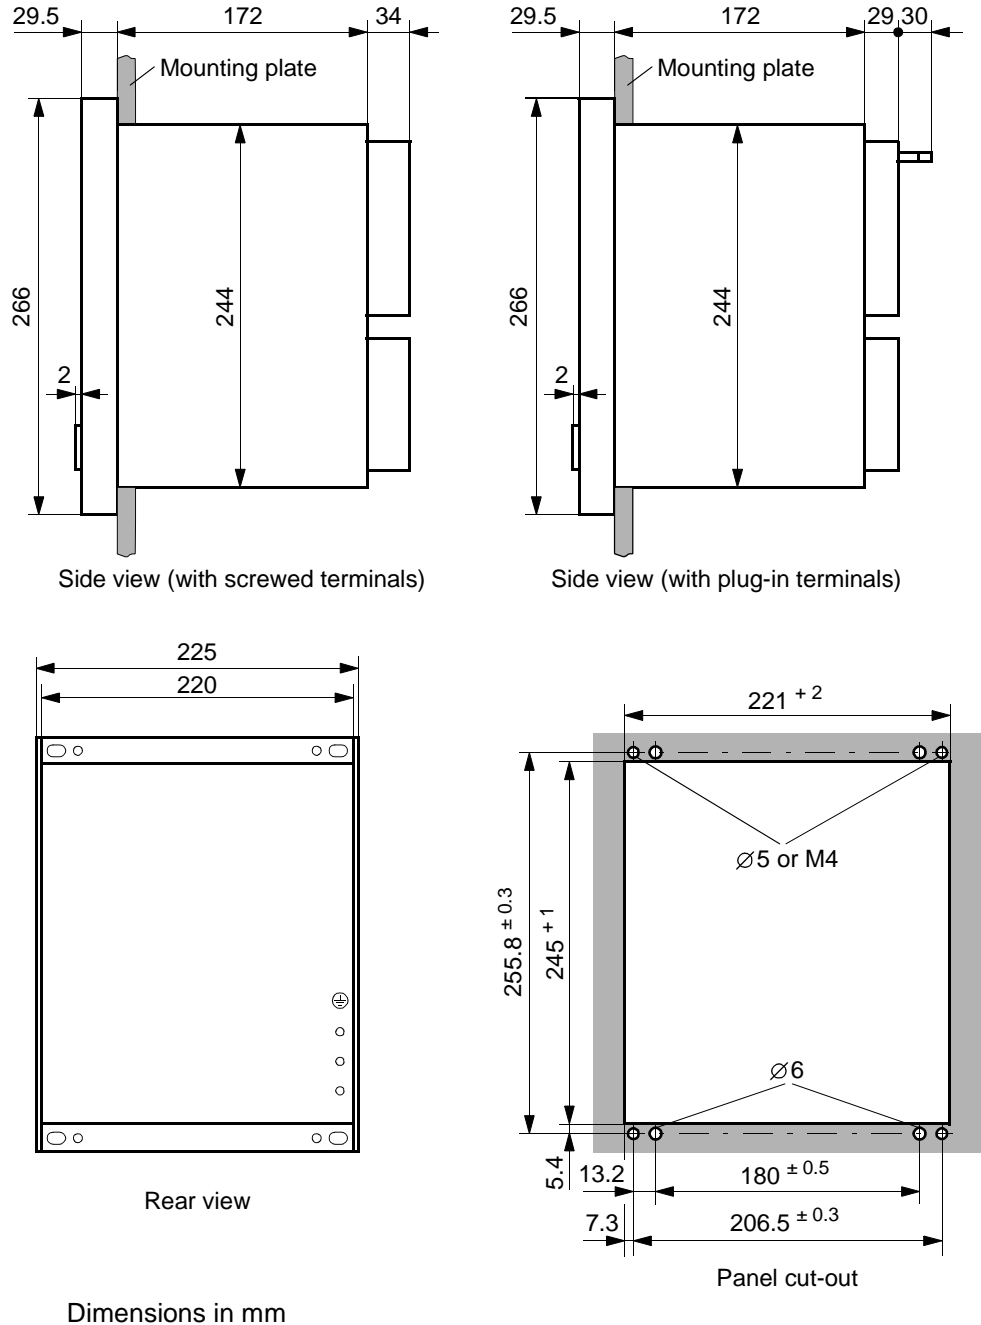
Dimensions 7UT6 for panel flush mounting or cubicle installation (size $1\frac{1}{2}$)
